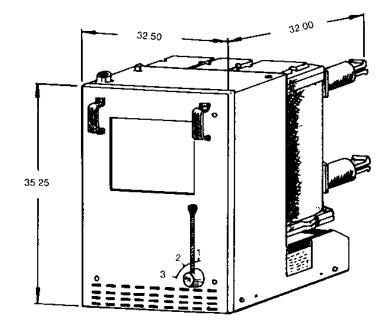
SF6 Metal-Clad Circuit Breaker (Weight 440 lbs.)
